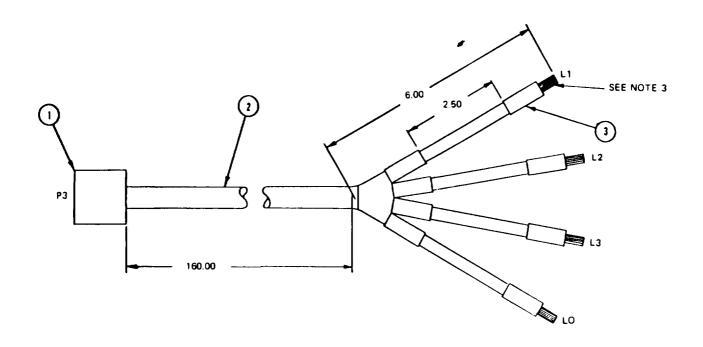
Bottom Load Bank Wiring Harness (Sheet 2 of 2), Drawing No. 72-2825
